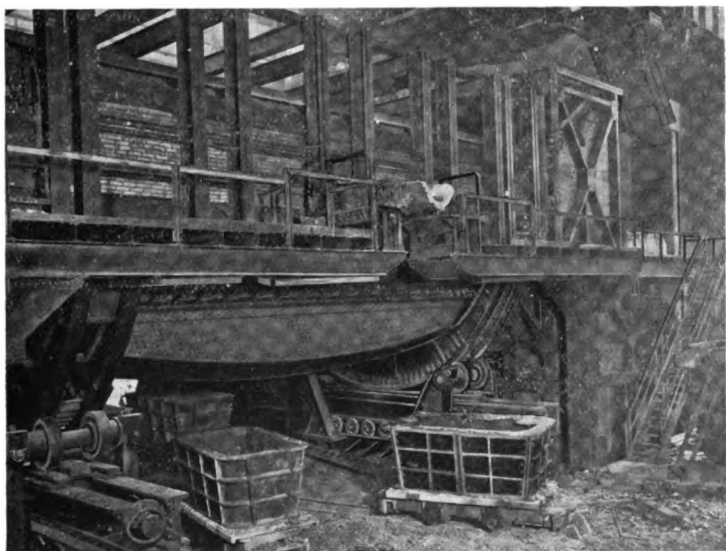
VIEW SHOWING ARRANGEMENTS FOR TILTING OPEN HEARTH FURNACE
